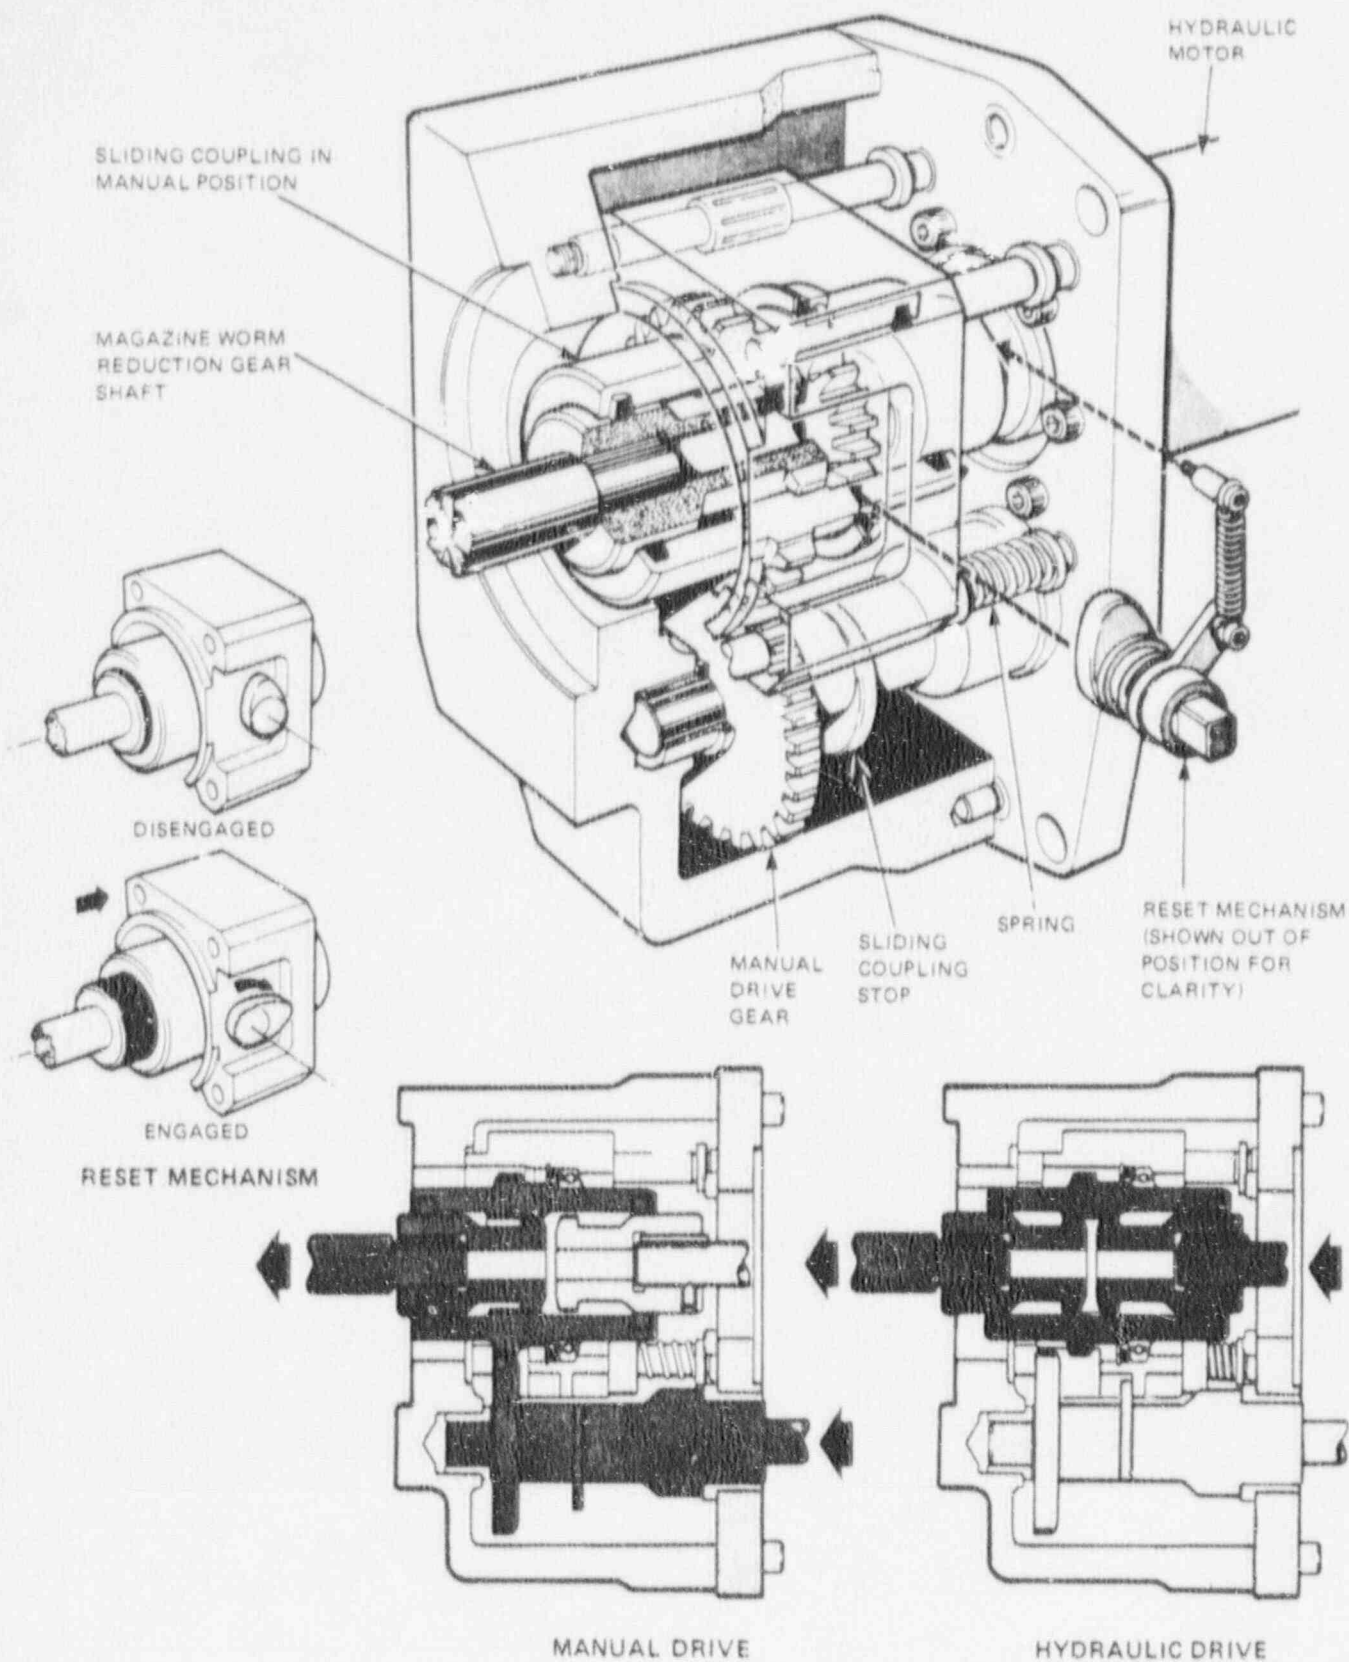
MAGAZINE EMERGENCY DRIVE GEARBOX
